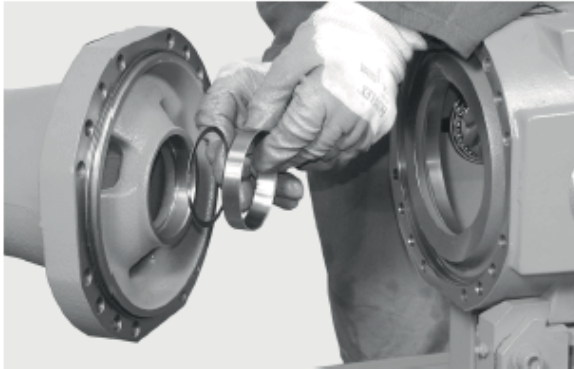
SETTING OF THE CROWN WHEEL AND PINION
